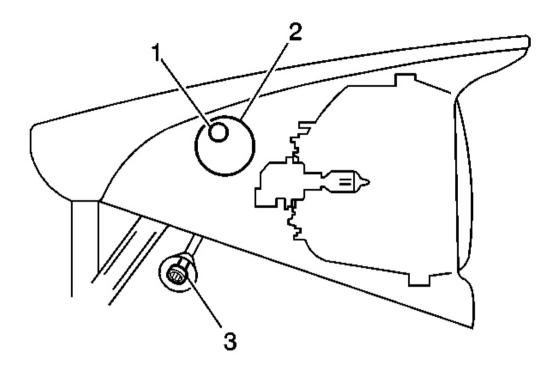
Headlamp Assemblies & Headlamp Bezel Courtesy of GENERAL MOTORS CORP.
